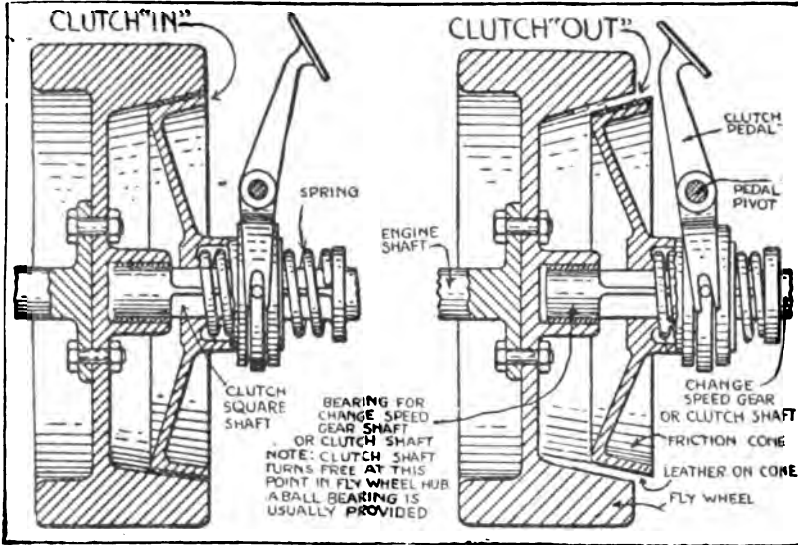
Illustrates how the cone type of clutch is fitted into the fly wheel. Illustration shows same in section as if cut in half. The cone is perfectly circular, but cone shaped and fitted with leather which grips the inner surface of the fly wheel rim when clutch is "in," which it always is, unless thrown "out" by the clutch foot pedal.
